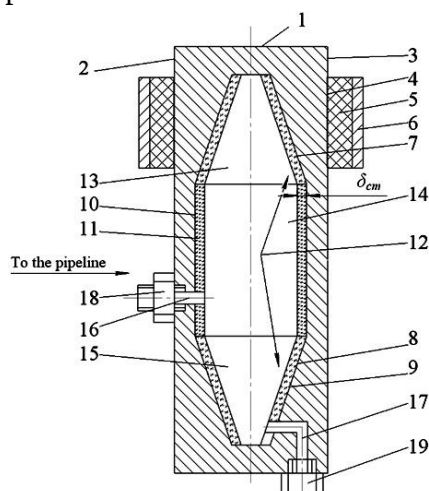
Schematic representation of a single-chamber disc-shoe brake of a drilling winch with a system and method of forced air-nano-liquid cooling: 1, 2 and 3 brake disc with left and right halves; 4 - friction belt; 5, 6 - friction lining with a metal substrate; 7, 8 and 9 - upper and lower diffusers and their internal surfaces; 1 - modifications of capillary structures; 12 - common chamber; 13, 14 and 15 - zones: two evaporations, combined transport and condensation; 16, 17 - openings-channels; 18, 19 - inlet and outlet valves
